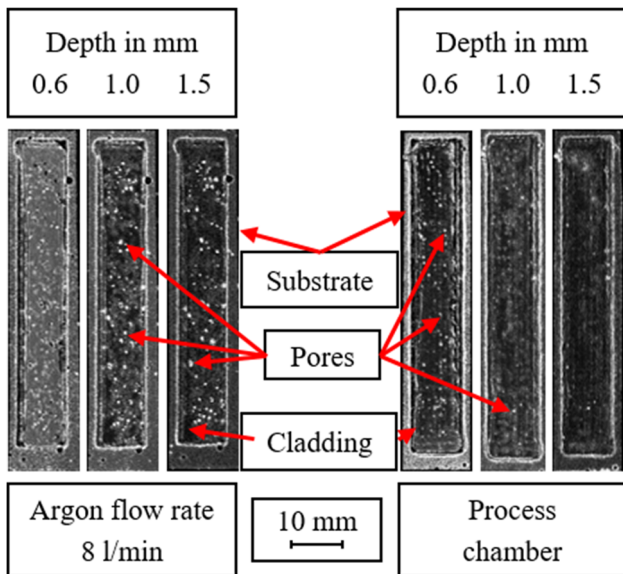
SAM images for non-destructive detection and quantification of weld defects with and without a process chamber using weld parameter set P1
